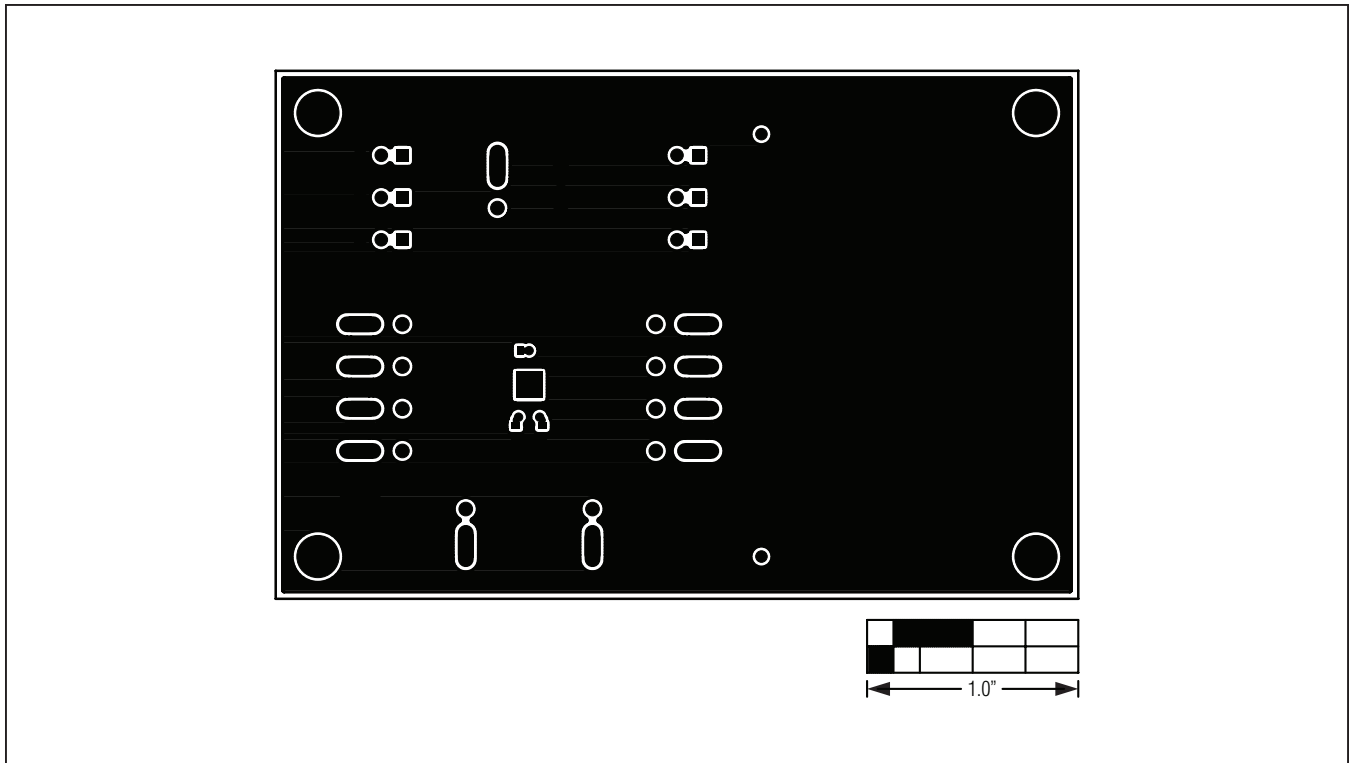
MAX14778 EV Kit PCB Layout—Solder Side
